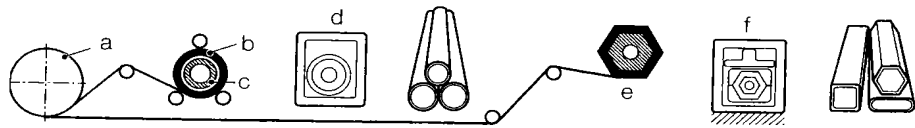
Further processing of impregnated carrier materials to afford profiles and tubes
